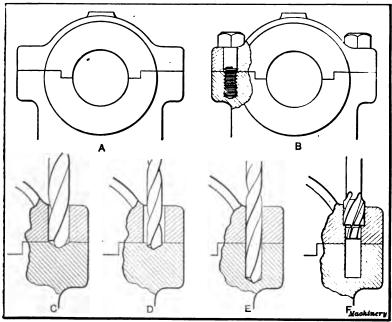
Views indicating how Work can sometimes be used as a Jig
